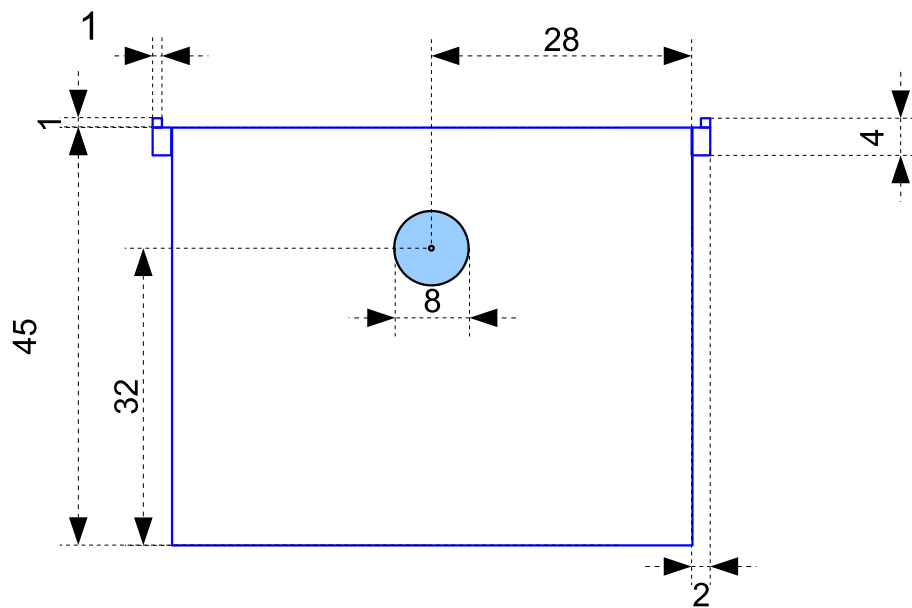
Ale III* thruster back view with the opening for the propeller stern tube. All dimensions are in mm.
